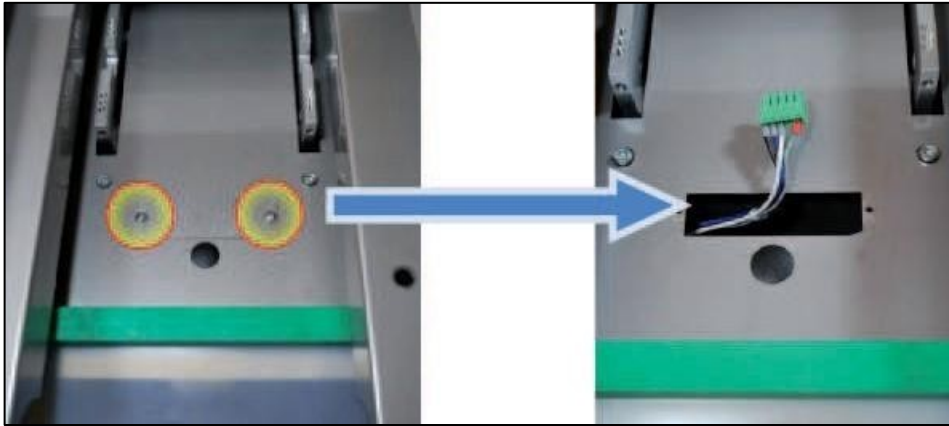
Cover Plate on Feed Deck (left), Cable to the LED Controller (right)
